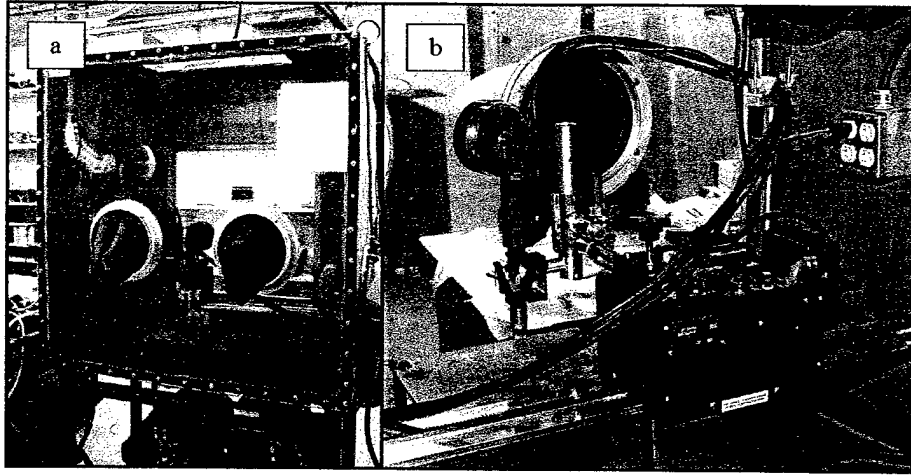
a) Front View of inert gas environment welding glove box which was set up for welding of Mg-Li and other reactive metals b) A picture of the inside of the glove box showing the motorized torch carrier with a GMAW spool gun attached. The box is wired to allow the use of GMA and GTA welding.
